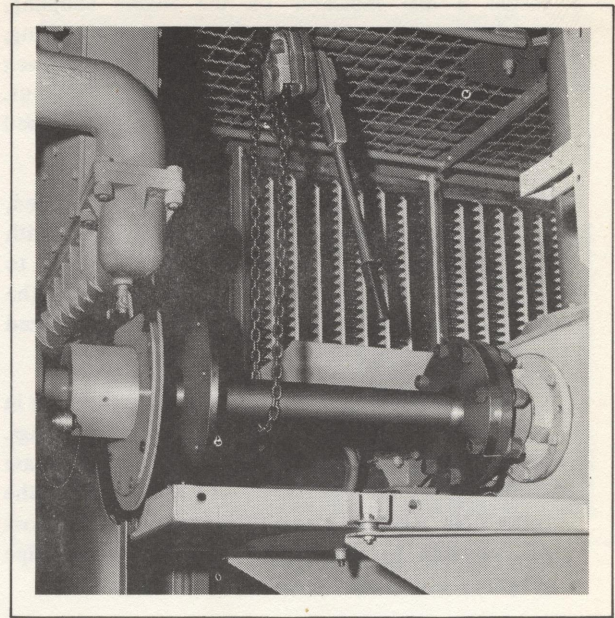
SUPPORTING FAN GEAR-UNIT SHAFT.
